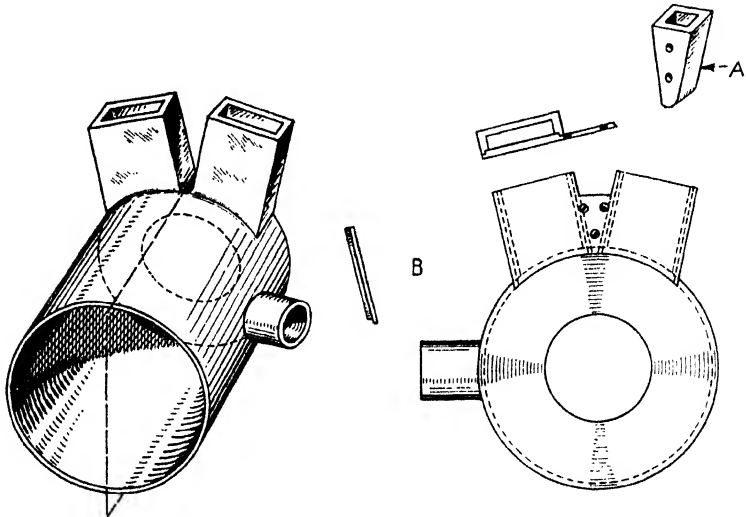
In this casting, the vertical parting plane is through horizontal axis of piece and midway between hollow rectangular projections at far end, which is closed except for central hole, latter being formed by a boss on end of large cylindrical core, which is withdrawn, of course, parallel to axis. Core for projection at right is fixed in die, its axis being parallel to die motion and at right angles to parting plane. At least two angular cores are needed to form passages in rectangular projections and recess between them, making an expensive die. Die cost would be much decreased if front and rear walls of rectangular projections were made continuous, a single vertical core used, and a triangular bridge, *A*, cast in small separate cavity of same die, inserted to form separate passages. Reduction in cost could also be effected if far walls of rectangular projections were made as a separate plate, as in sketch *B*. Then recesses of rectangular passages and a triangular recess between them would be formed by a core moving parallel to large central core but in opposite direction, the plate being die cast in a separate cavity of same die.
